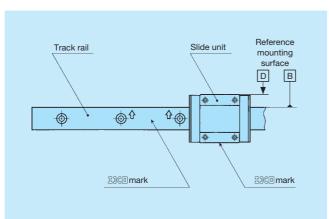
Reference mounting surface and general mounting structure of LWL2 or larger
